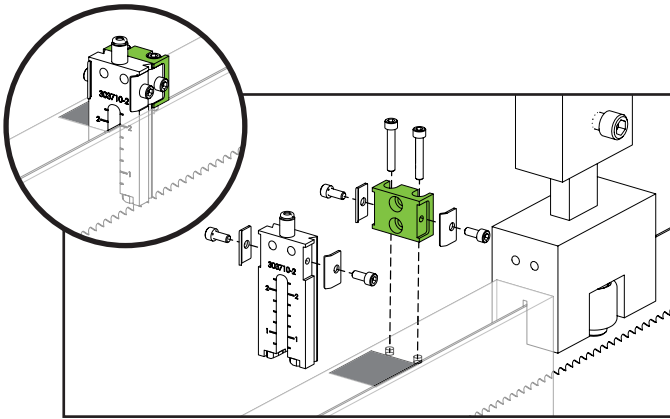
Mounting the Band Saw Blade Nozzle to the blade guard using the block mount option
